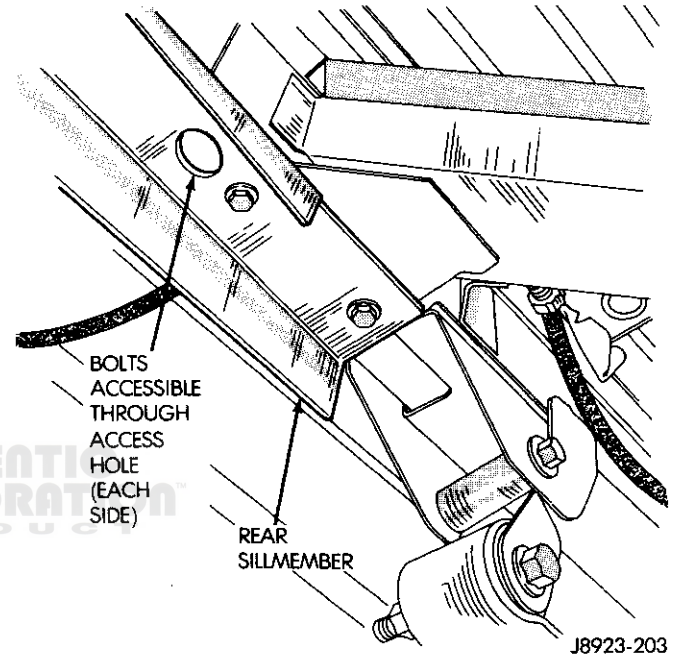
Sillmember-To-Cargo Box Bolt Locations
